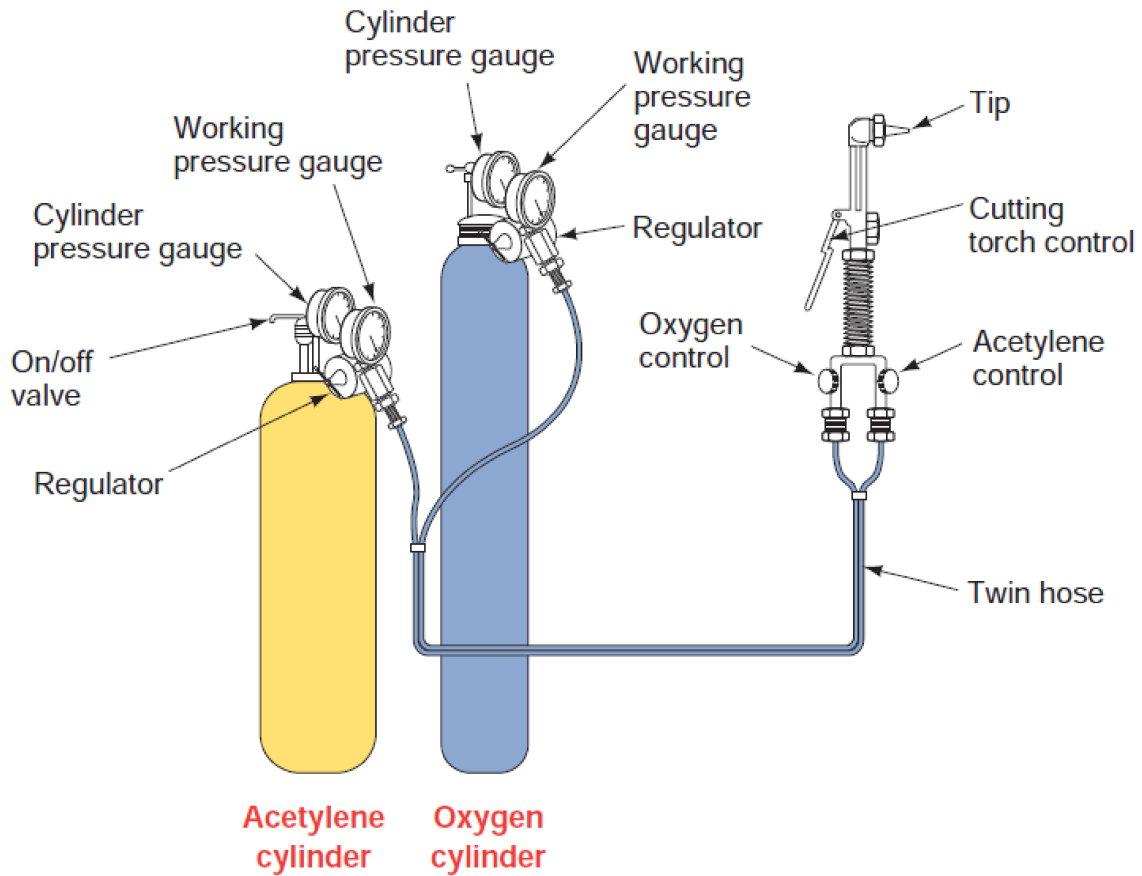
Oxyacetylene welding equipment shown with a cutting torch.
